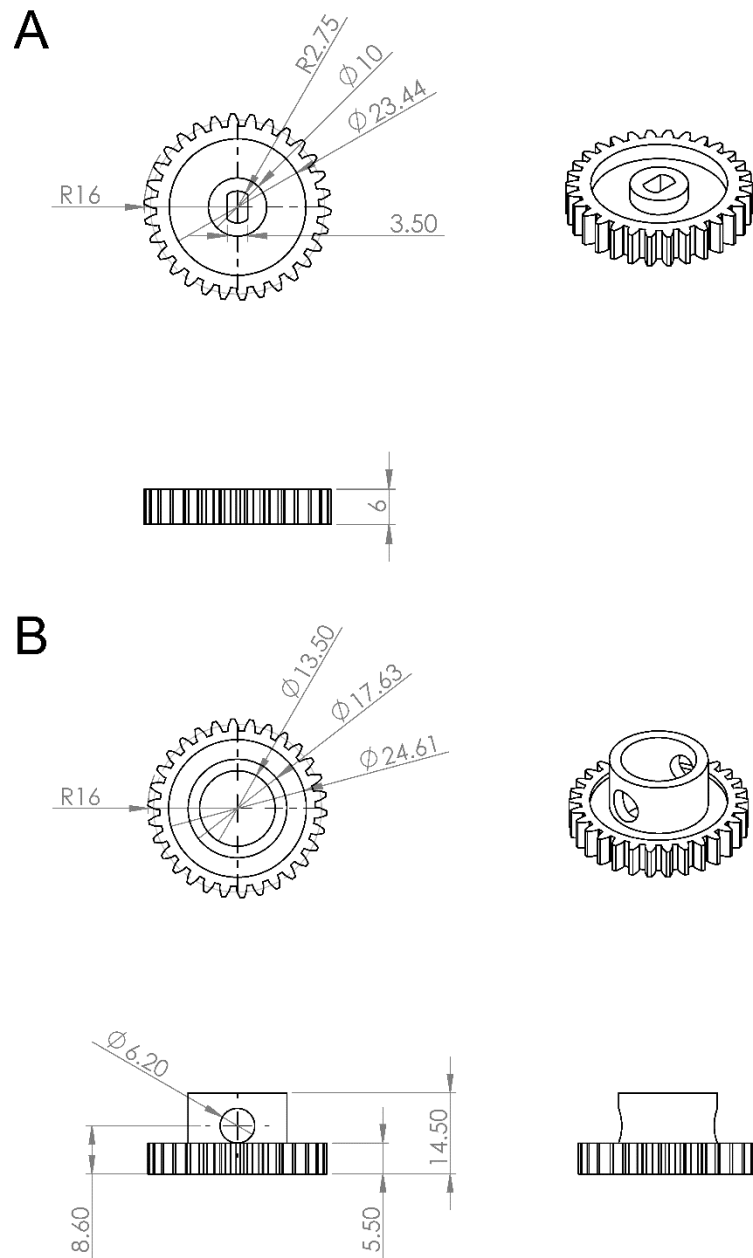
(A) 3D-printed gear that fits the step motor shaft in the directionality test
